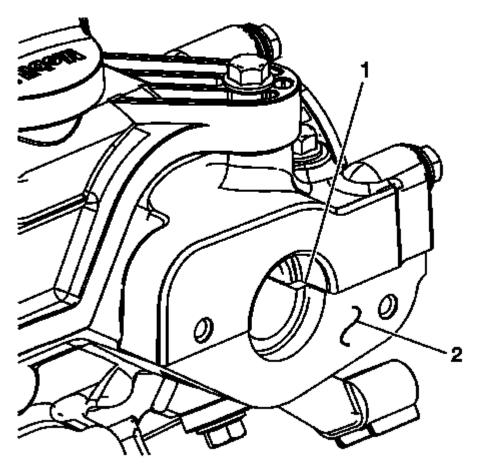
View Of Oil Nozzle & Bolt Courtesy of GENERAL MOTORS COMPANY
